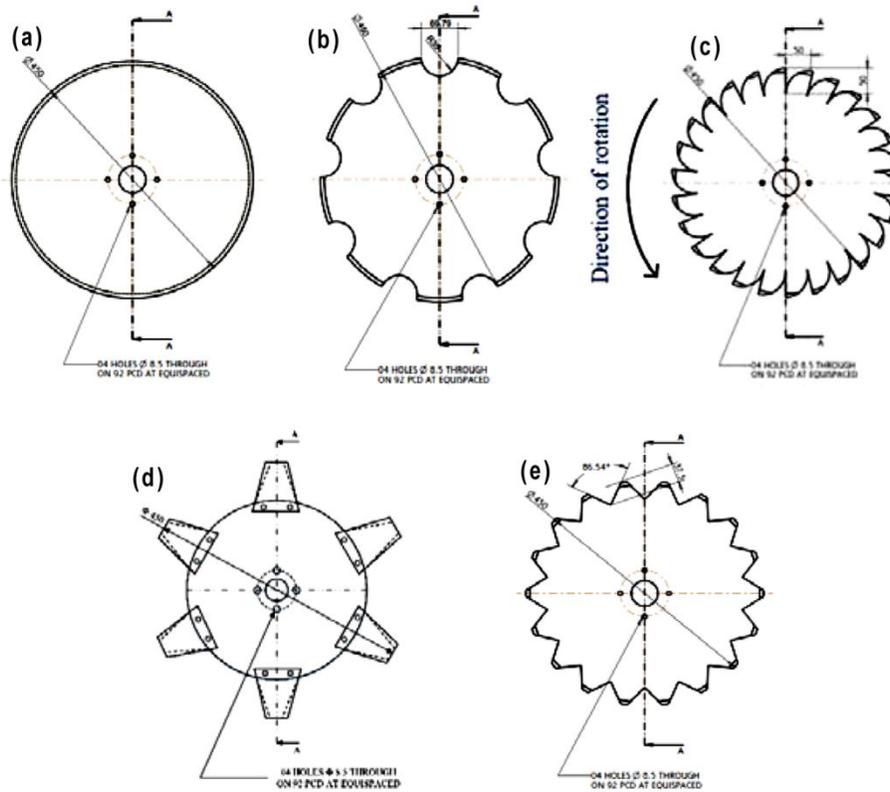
Drawing of different disc coulters used in residue cutting system
